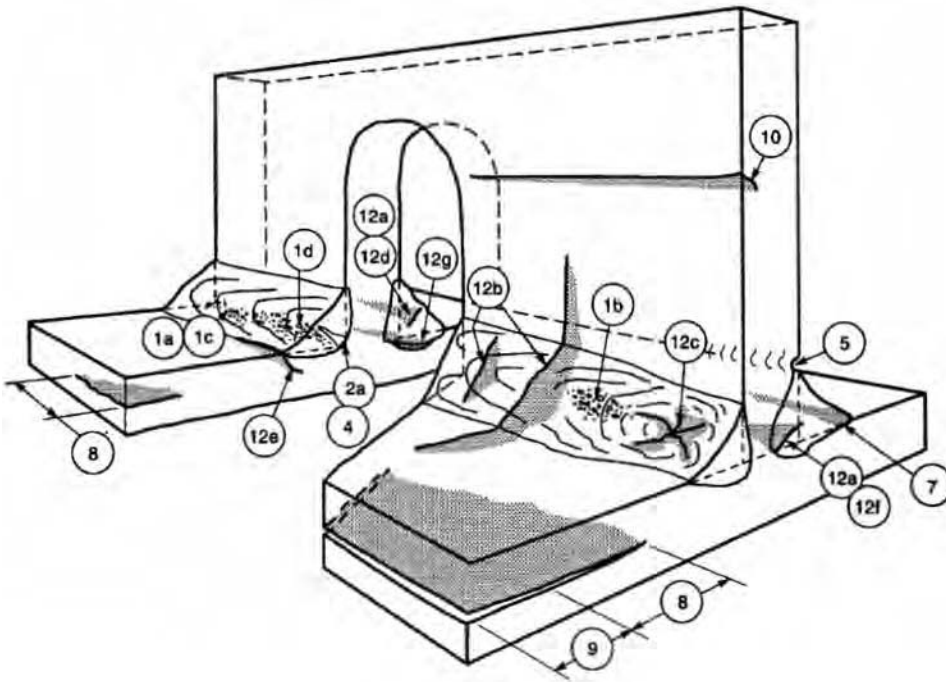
Single-pass double-fillet weld in T-joint illustrating weld discontinuities. Numbers in circles refer to Table 3. Source: Ref 45
